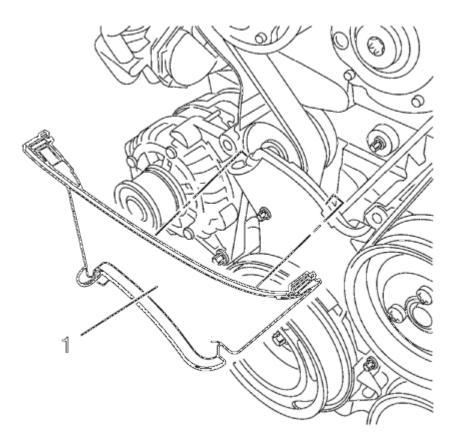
Timing Belt Center Front Cover Courtesy of GENERAL MOTORS COMPANY
